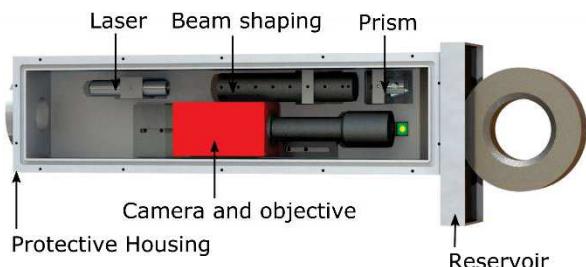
Assembly of concept C. For better visualization in the figure, the measurement system is rotated 90° compared to the installation position in the manufacturing machine.
